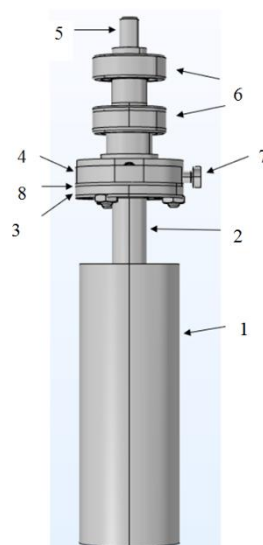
General view of the friction unit implementing friction. Rotating steel rod (1), hollow cylinder counterbody (2), plate counterbody (3), steel table holder (4), rotating steel rod (5), zirconium oxide bearings (6), screw-holder (7) of the thin rod (see text) connecting the table-holder and the strain gauge beam thus constraining rod (5) from rotation, electrical and heat-insulating paper layer (8)
